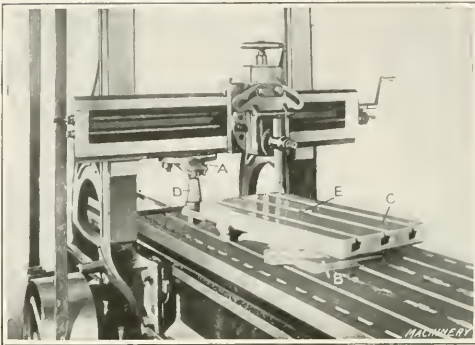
H. B. Underwood & Co.'s Radius Attachment for Planer
